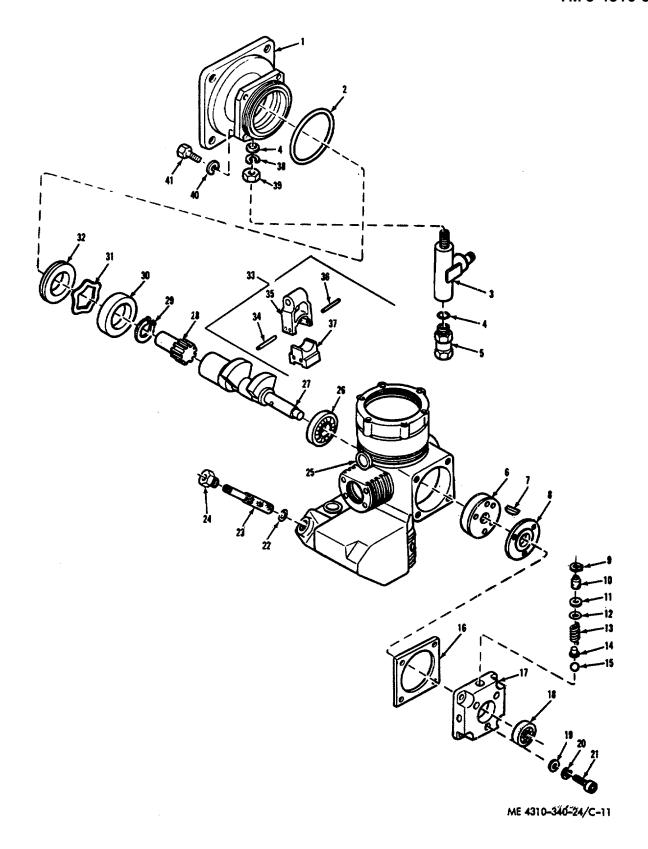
Crankcase, crankshaft, oil pump, oil strainer, and related parts – exploded view
